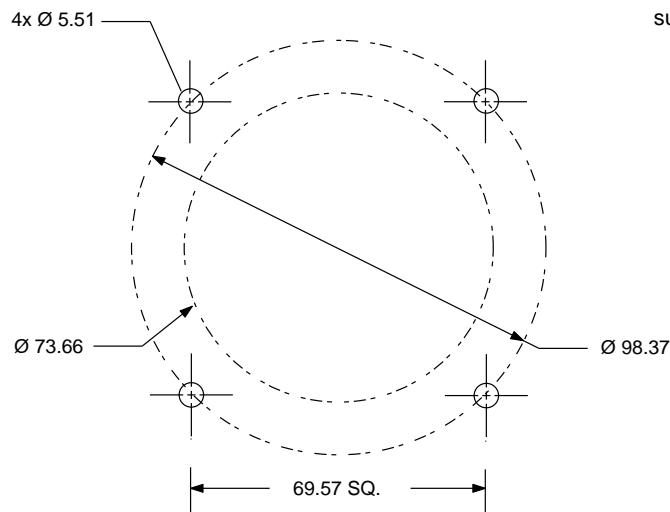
MDrive 34 Microstepping mounting and drill pattern
